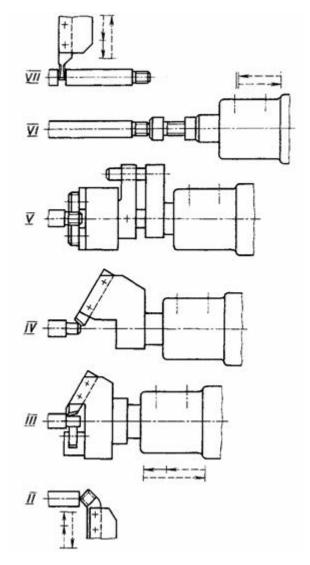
Scheme of machining the threaded finger from the rod material: From - unscrew, apply to the stop and with a small outlet, secure the rod (not shown), and - cut the tip; III - sharpen the end under the thread; IV - to remove the chamfer; V - cut the thread, YOU - apply the rod to the length of the stop and fix the rod; VII - cut off the detail
